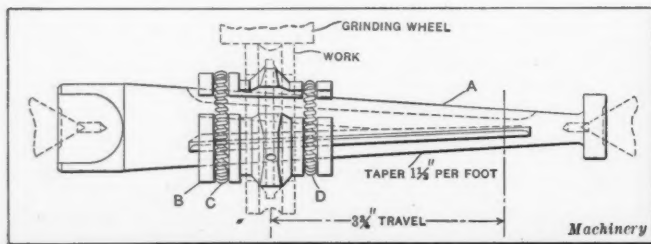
Special Taper Expanding Mandrel for holding Outer Ball Race when grinding External Diameter
